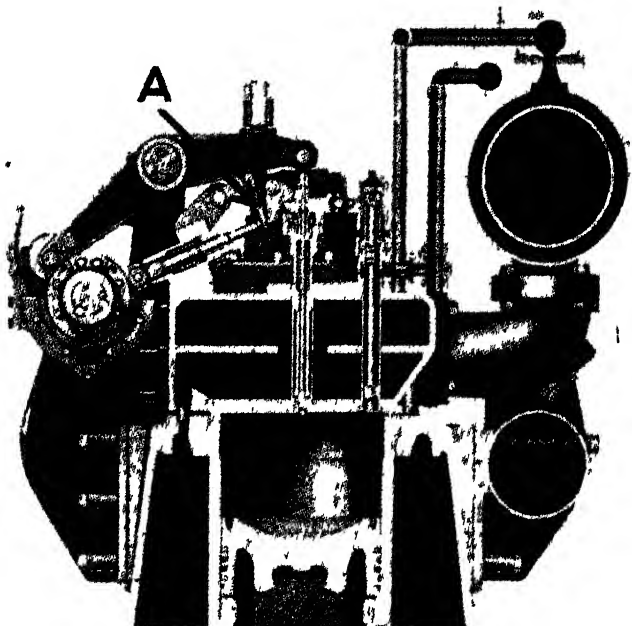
Valve gear of a Cooper-Bessemer Diesel.
